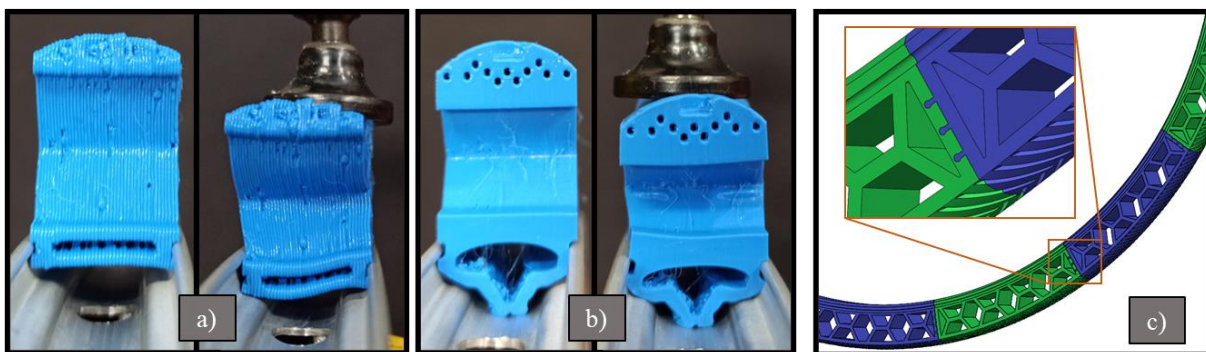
Examples of coupling mechanisms: a) Mounting between a simple tire section and the wheel rim; b) Mounting between a deformable tire section and the wheel rim; and c) CAD model of a connection between tire sections.
